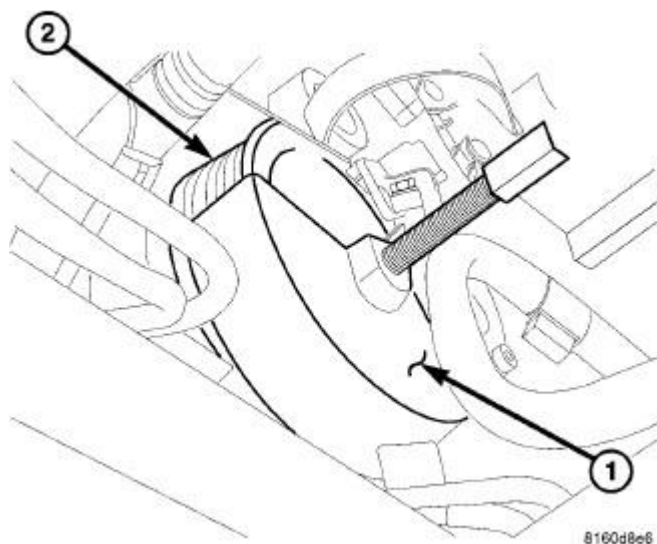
SPECIAL TOOL #9544 VIBRATION DAMPER PULLER
